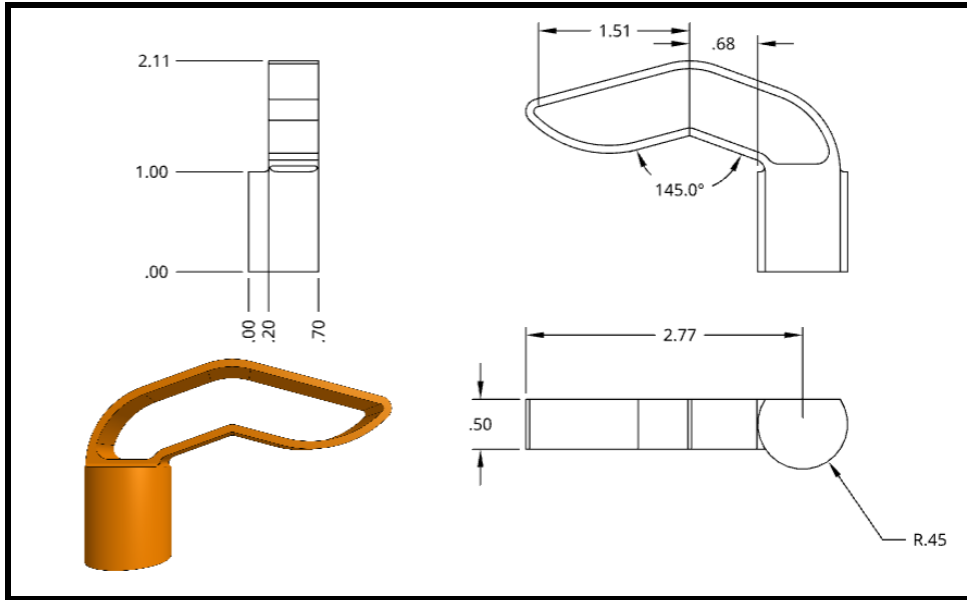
Front, side, bottom, and an angled 3D view of the thumb component are shown with overall dimensions in inches and key angles in degrees.
